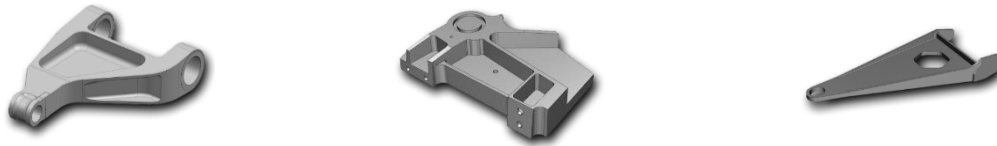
Aircraft parts made using digital CNC machines. [4]
